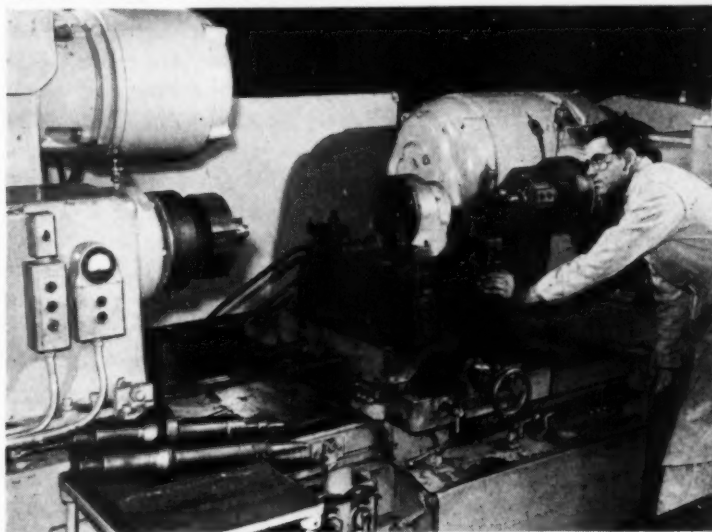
Boring machine with multispeed squirrel-cage motors powering spindles. Two-speed motor drives mechanical adjustable-speed transmission on one spindle and four-speed motor powers other spindle
